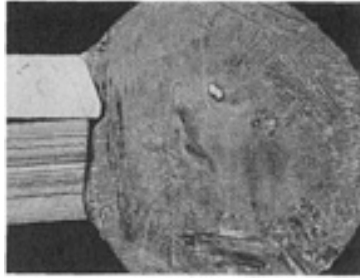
WELD JOINING UNS S43735 SUPERFERRITIC STAINLESS STEEL (TOP) TO N08367 SUPERAUSTENITIC ALLOY (BOTTOM) USING N06625 NICKEL ALLOY FILLER METAL. NOTE DIFFERENCE BETWEEN MELT-BACK OF SUPERFERRITIC AND SUPERAUSTENITIC MATERIALS AND ISLAND OF UNMELTED SUPERFERRITIC STAINLESS STEEL NEAR CENTER OF WELD DEPOSIT. BOTH CONDITIONS INDICATE THE HIGH MELTING TEMPERATURE OF SUPERFERRITIC STAINLESS STEELS RELATIVE TO AUSTENITIC STAINLESS STEELS OR NICKEL ALLOYS. ETCHED WITH MIXED NITRIC/HYDROCHLORIC/ACETIC ACID SOLUTION. 14×
